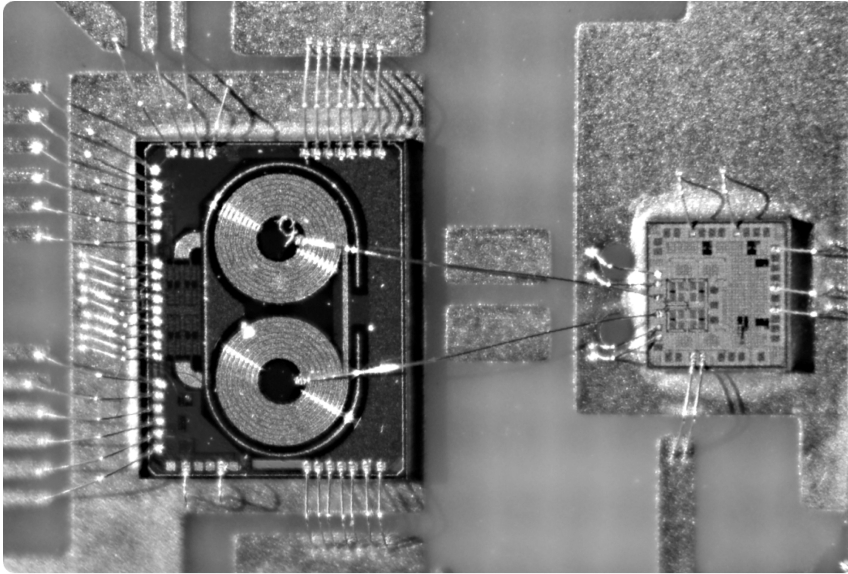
Micrograph of the overall dc-dc converter assembled on board.
